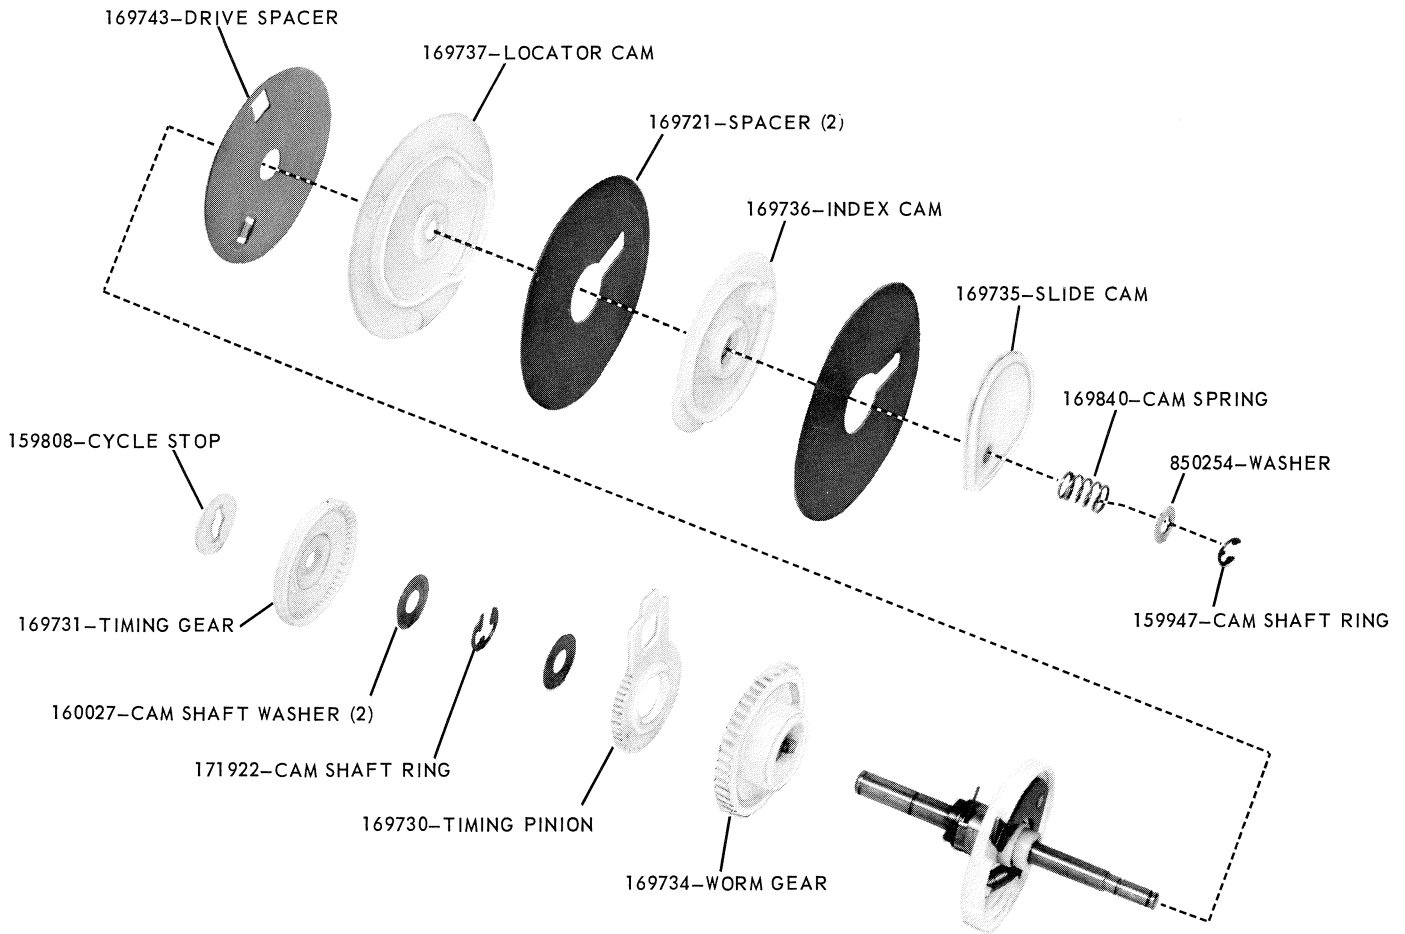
172730-CAM SHAFT ASSEMBLY
